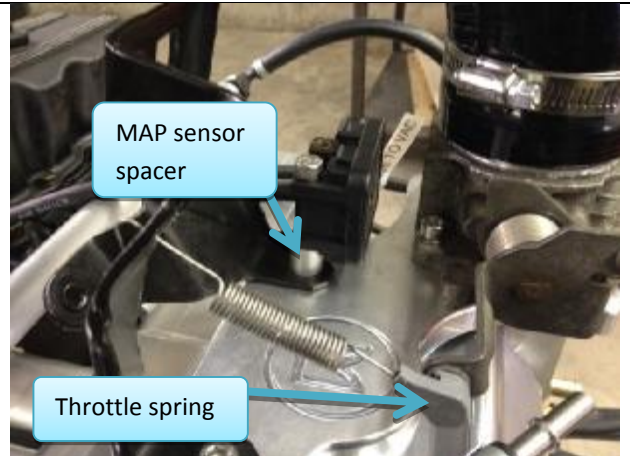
Throttle cable bracket installed with spring connected to throttle body.
